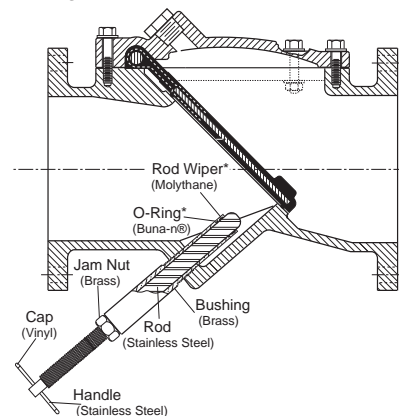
BACKFLOW ACTUATOR ASSEMBLY
